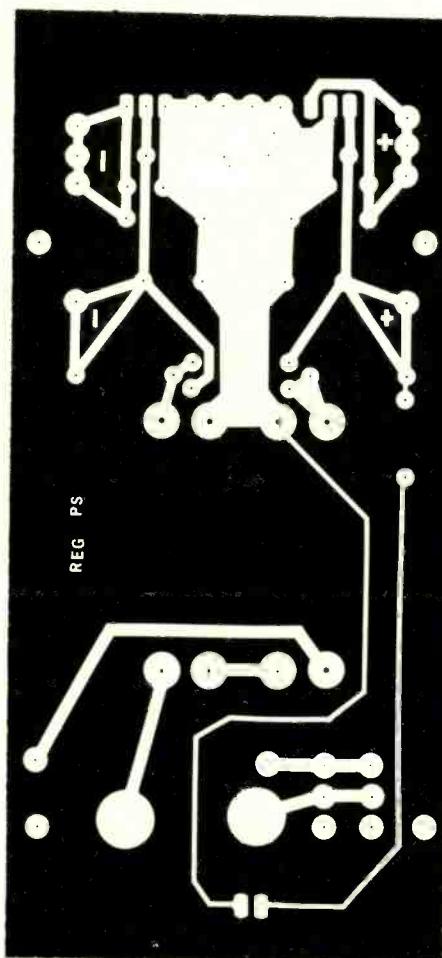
Etching and drilling guide for the ac power-supply printed-circuit board.
